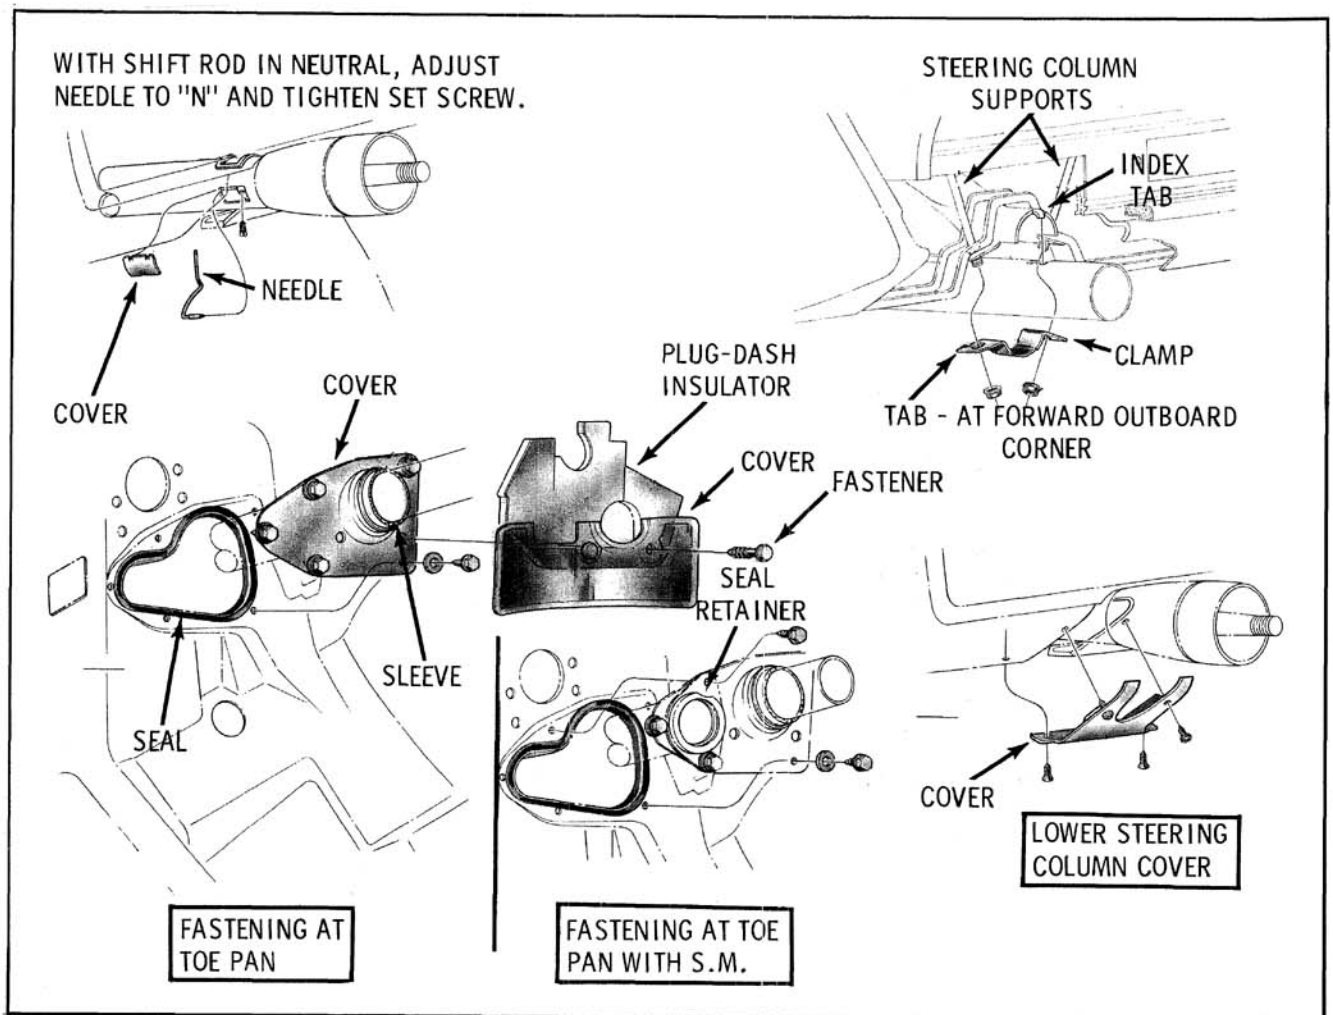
Steering Column Installation (33 through 38 Series)
